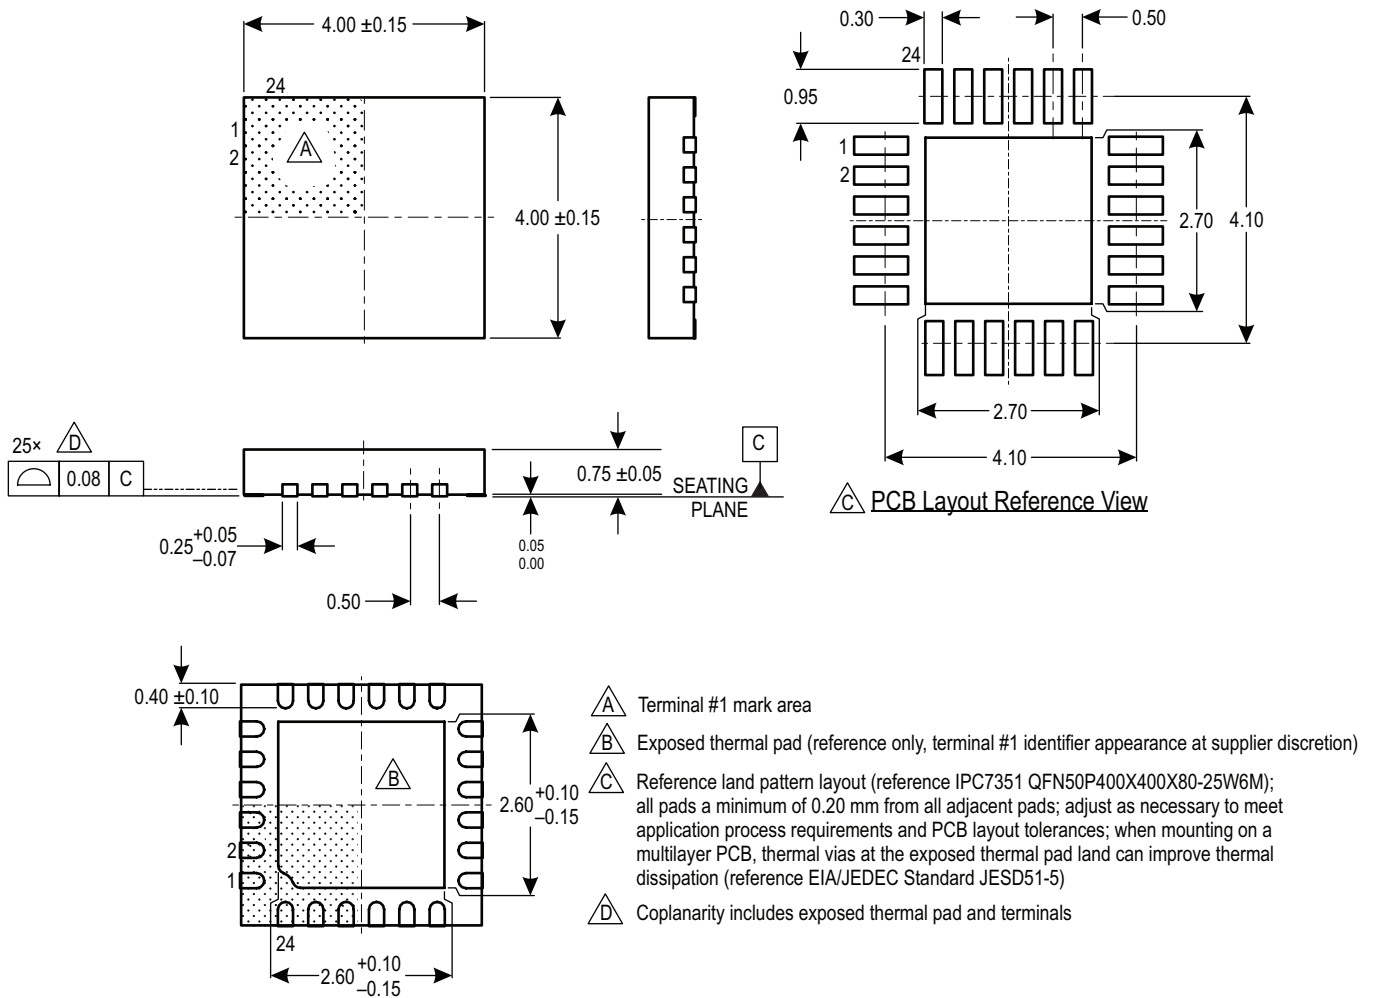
Package ES, 24-Contact QFN with Exposed Pad
